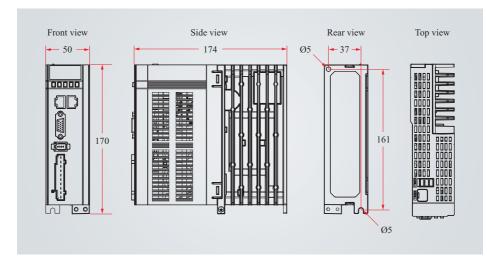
Installation dimensions for SIZE A (unit: mm)
